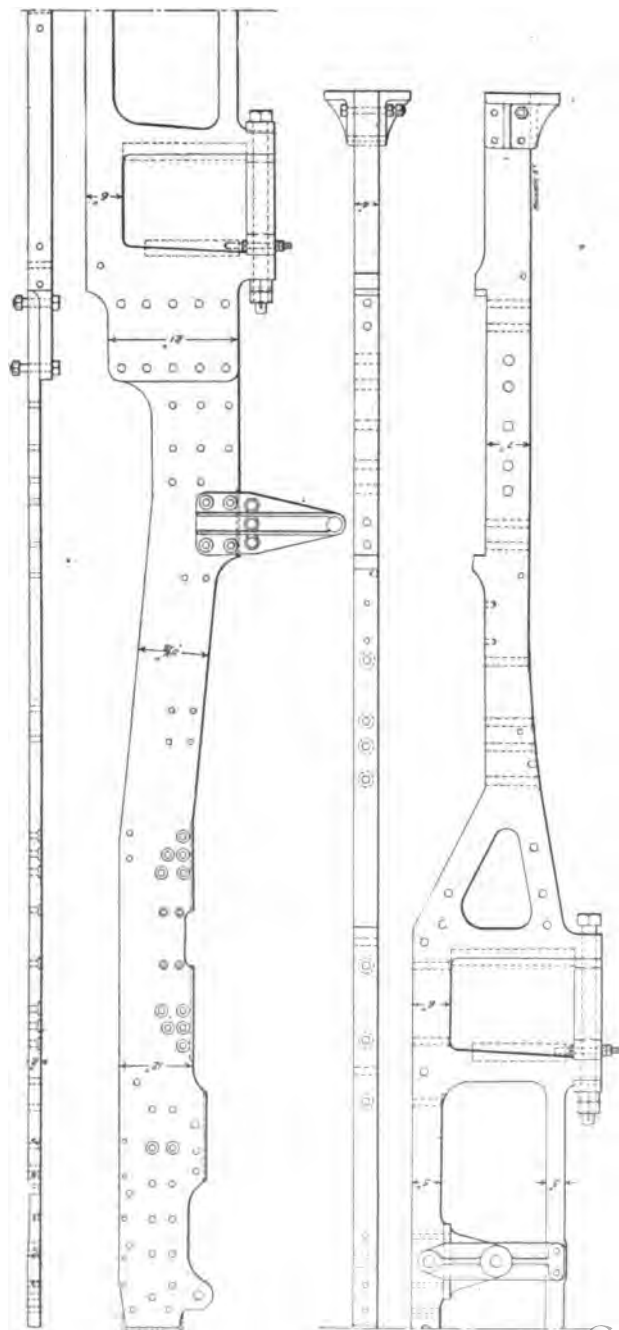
Frame for Atlantic Type Passenger Locomotive.
